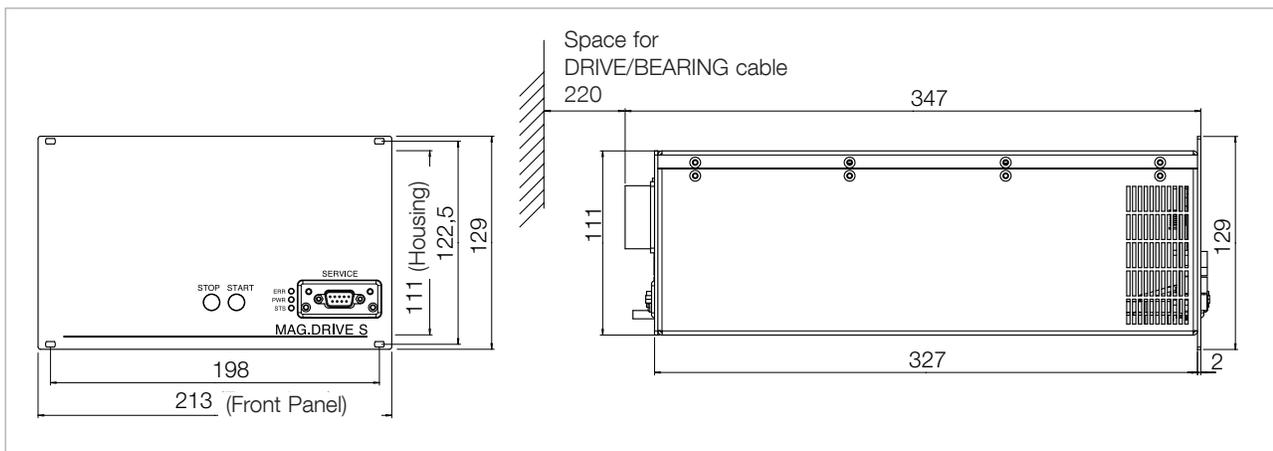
Dimensional drawing of the MAG.DRIVE S, dimensions in mm
